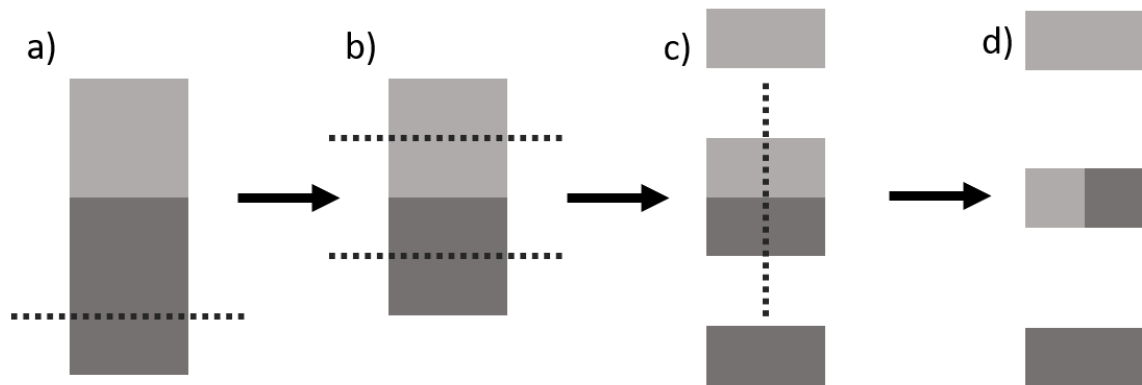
The cuts performed on the 316L-IN718 workpieces.
